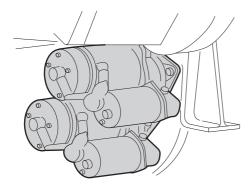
Starter - Check (Self Starter Motor Starting)
